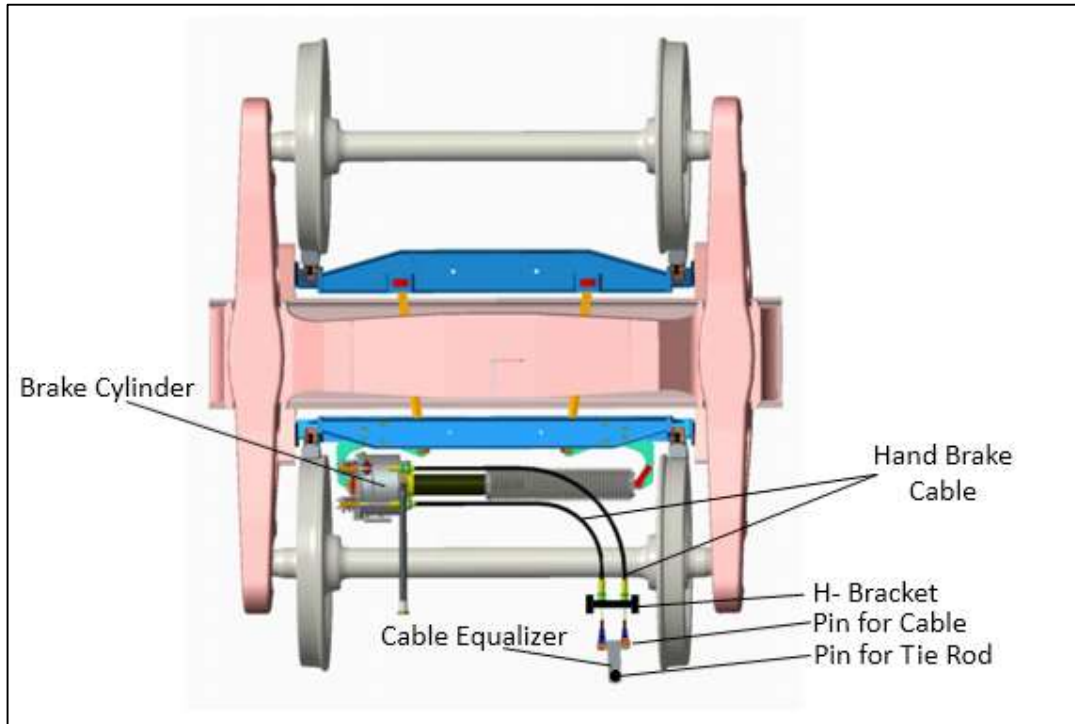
Hand Brake Cable with the Cable Equalizer and Tie Rod
